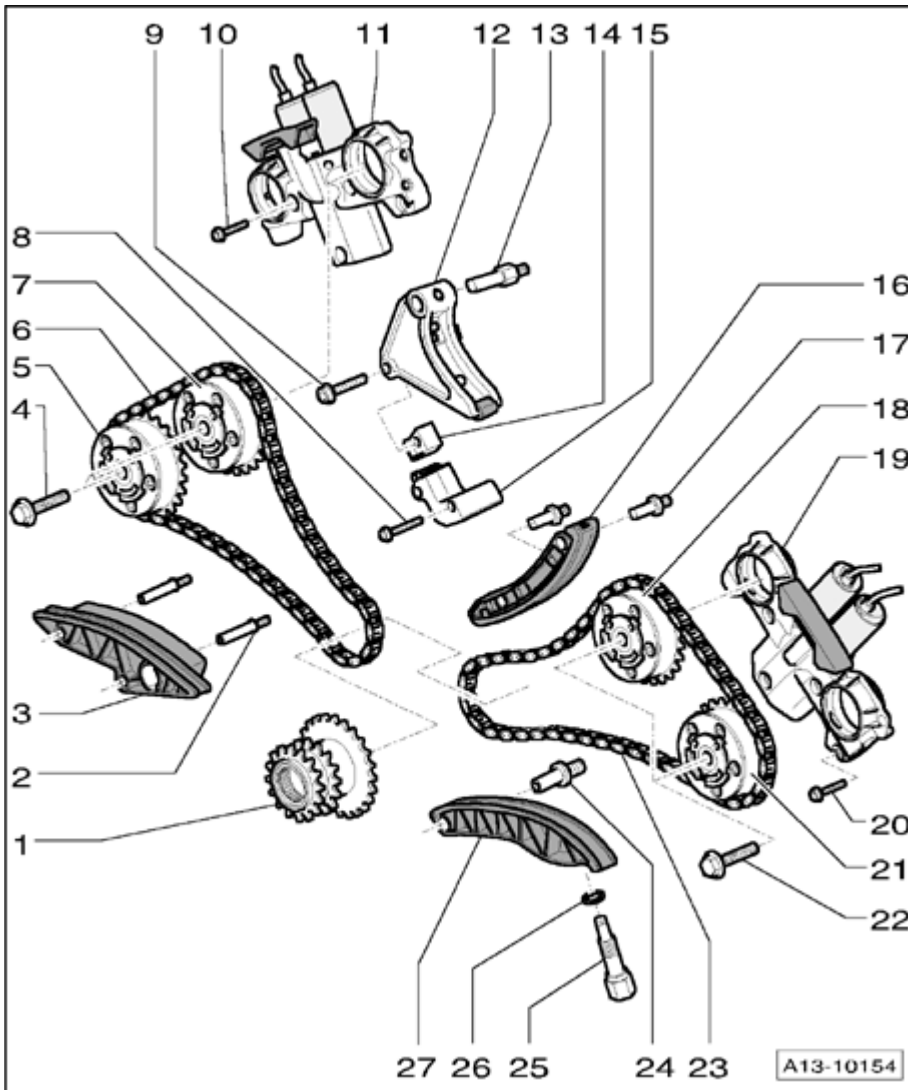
Timing Chains For Camshaft Drive, Assembly Overview
